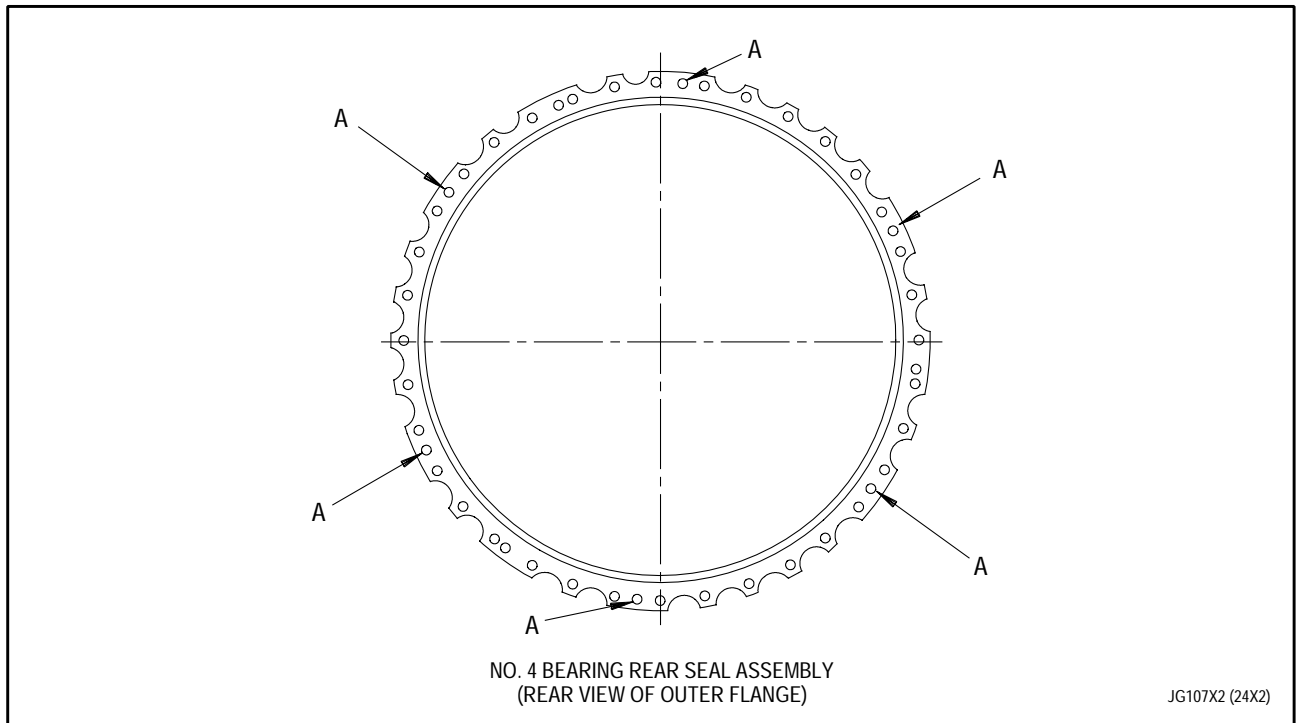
No. 4 Bearing Rear Seal Assembly - Bolt Installation
